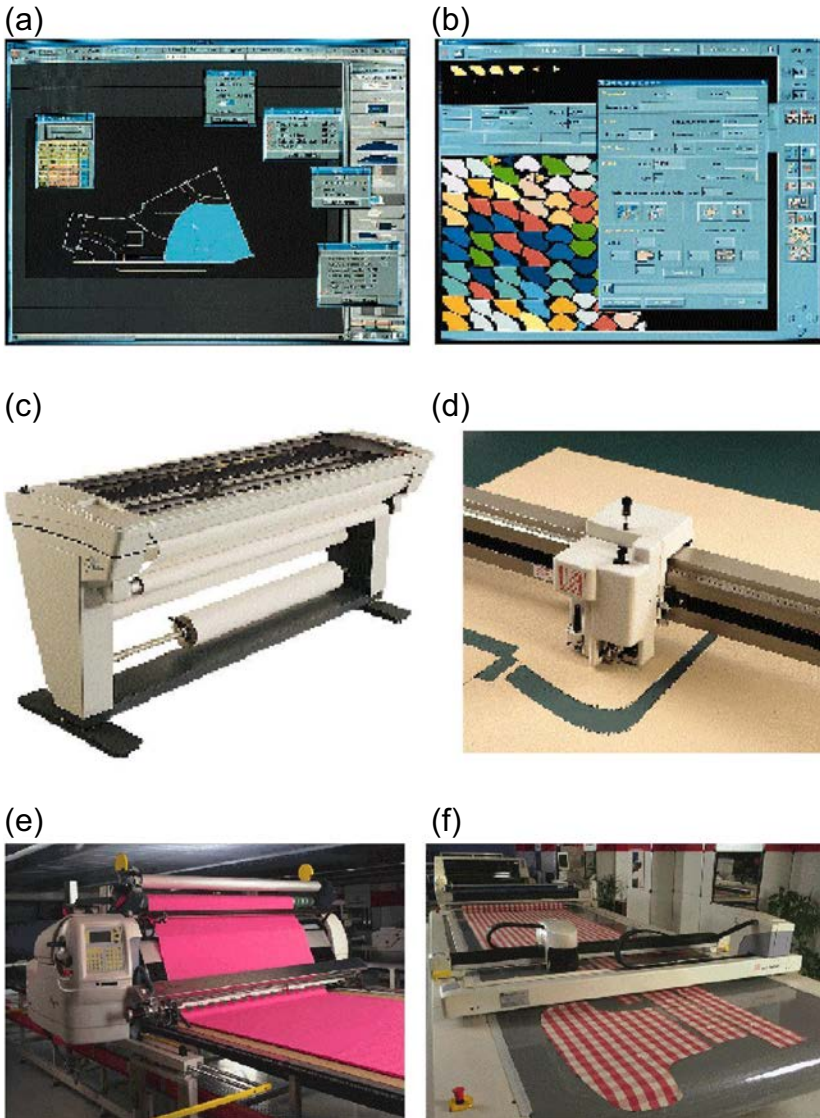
Application of computer-aided design in cutting room operations. (a) Pattern design, (b) lay planning, (c) cutter plotter for stencil design, (d) pattern cutting, (e) fabric laying in cutting machines, and (f) the cutting process.
